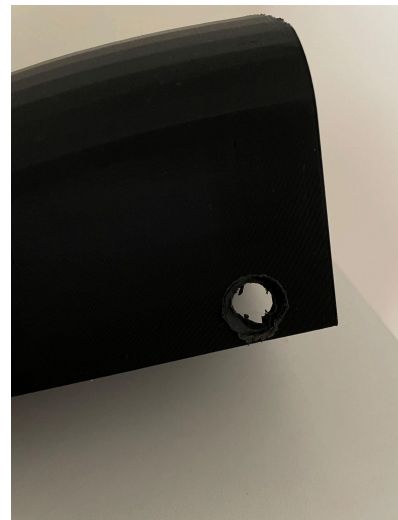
Close-up of drilled holes into the 3D printed cover
